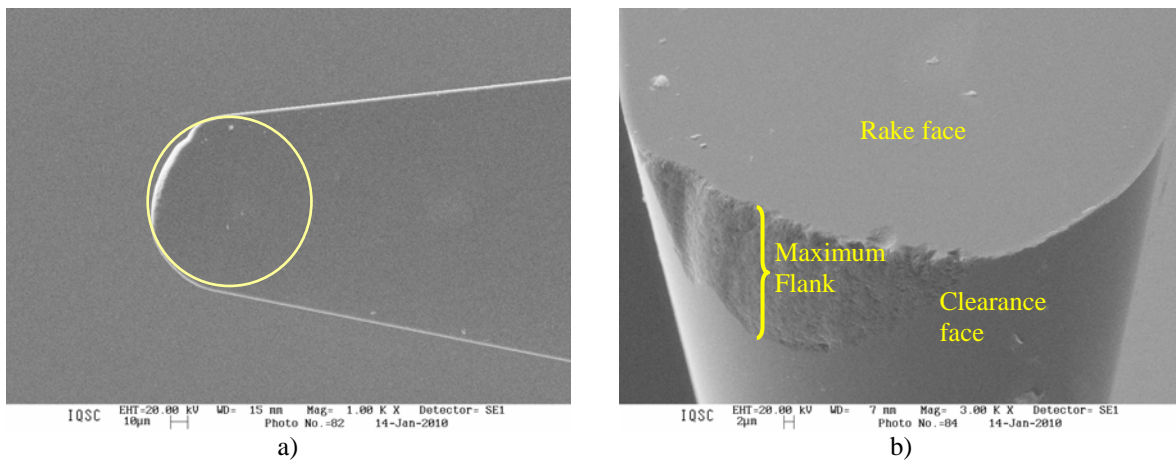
SEM photograph of the cutting tool after machining tests; a) tool nose radius showing a retraction due to wear and; b) tool clearance face showing flank wear and groove on the left portion.
